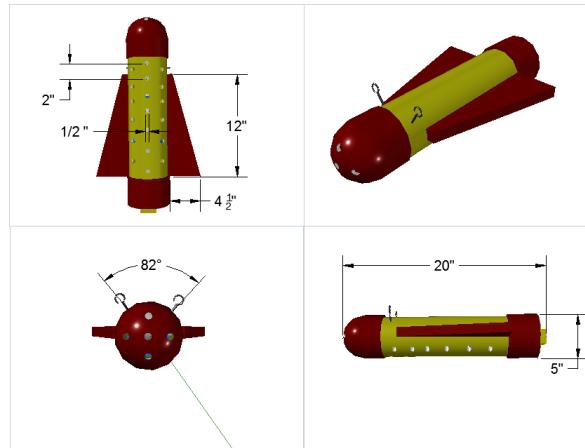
A protective outer cylinder with holes was used to house the inner cylinder.
